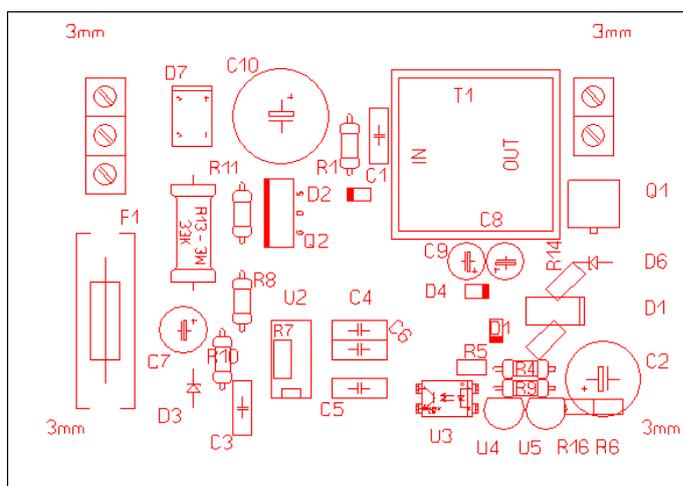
Components placement PCB of hybrid SMPS + TL431 + Mosfet power supply
